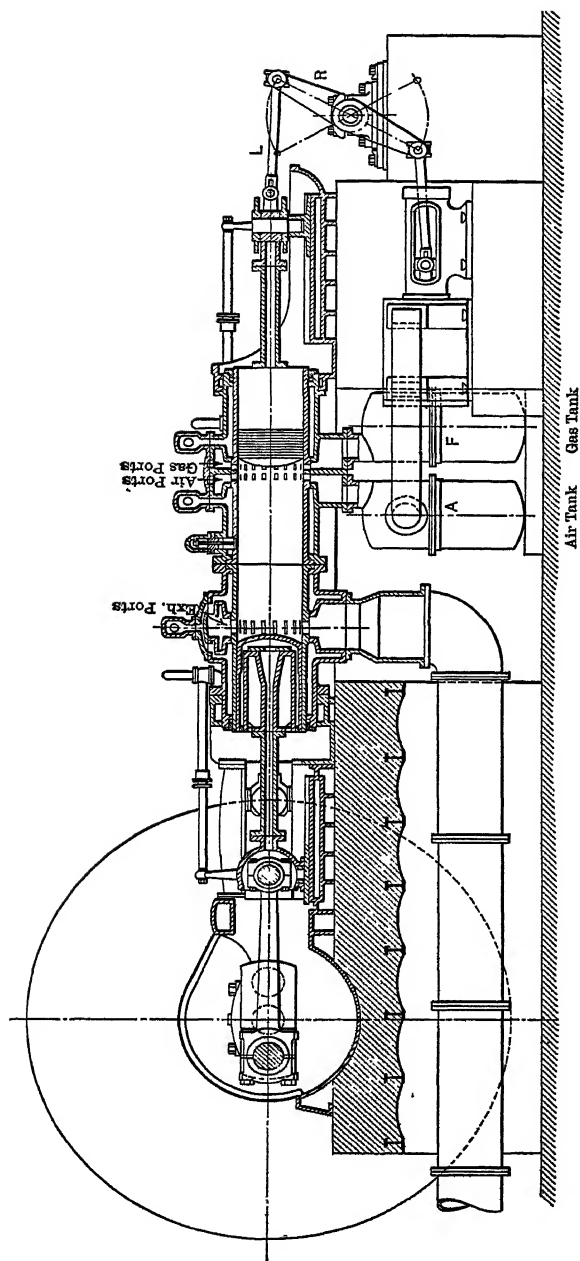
b*.—Oechelhaeuser Engine. Sectional Elevation.
